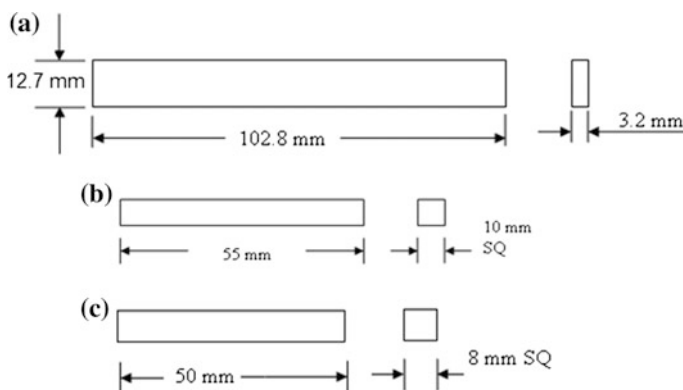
Flexural test specimen (a), impact test specimen (b) and wear test specimen (c)
